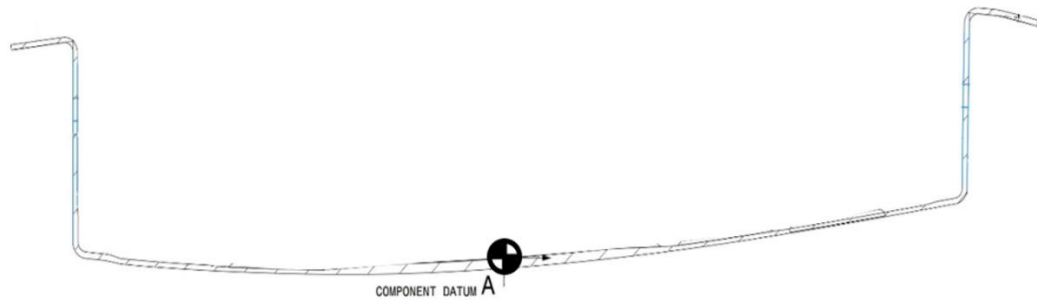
Wing-box datum structure for measurement and tolerancing.
